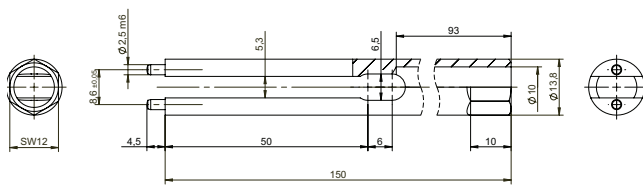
Mounting wrench ø13,8/SW12 Type 1300A5 for mounting bore > ø14 mm
